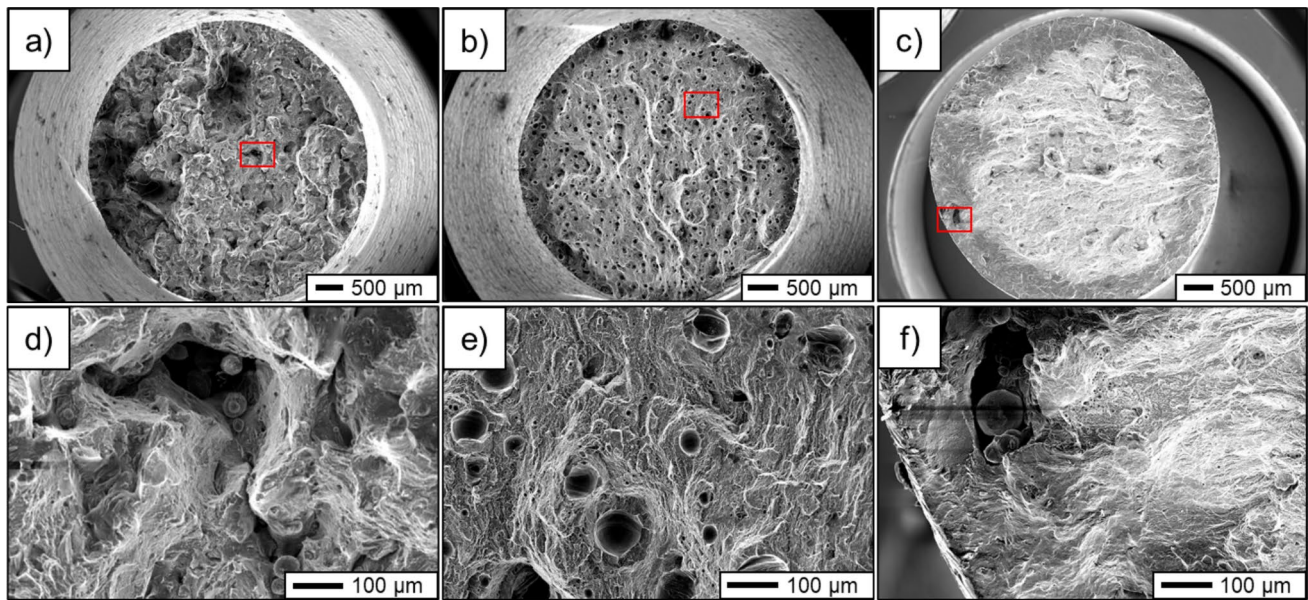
SEM images of the fracture surfaces and enlarged sections with representative pore defects in the fracture surface: a, d lack of fusion specimen; b, e keyhole specimen; c, f standard specimen with oxide/lack of fusion defect
